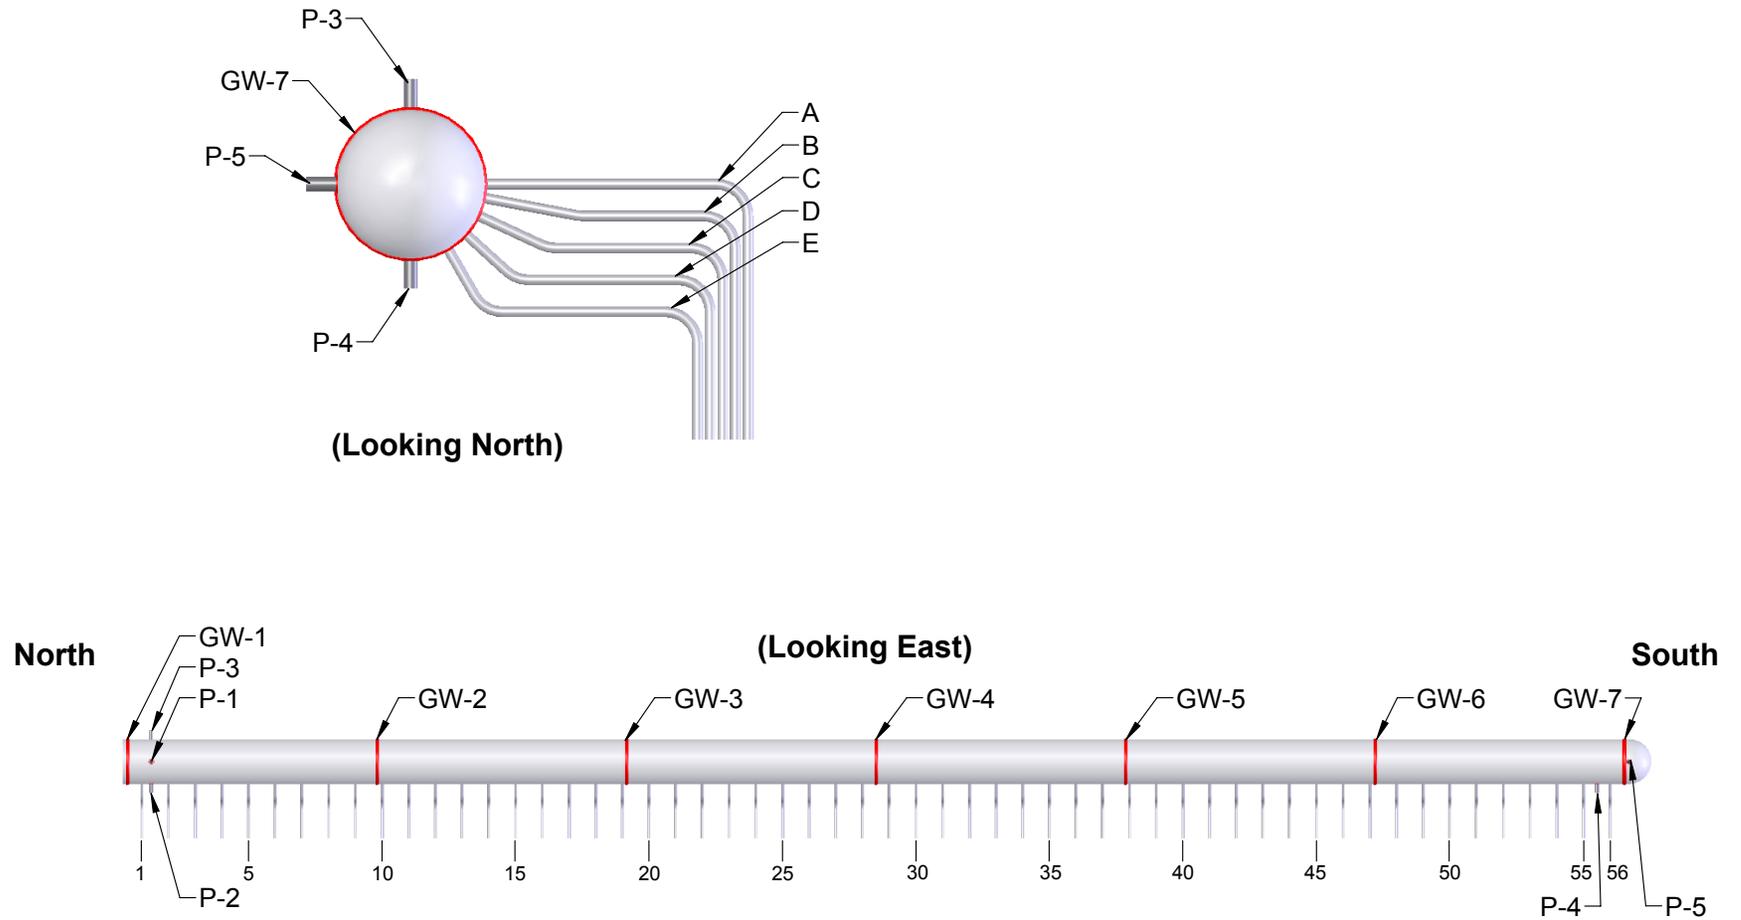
Sketches of the Lower Finishing Superheater Outlet header
